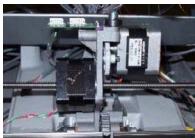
Color Change/Take-Up/Feeder Housing Assembly
